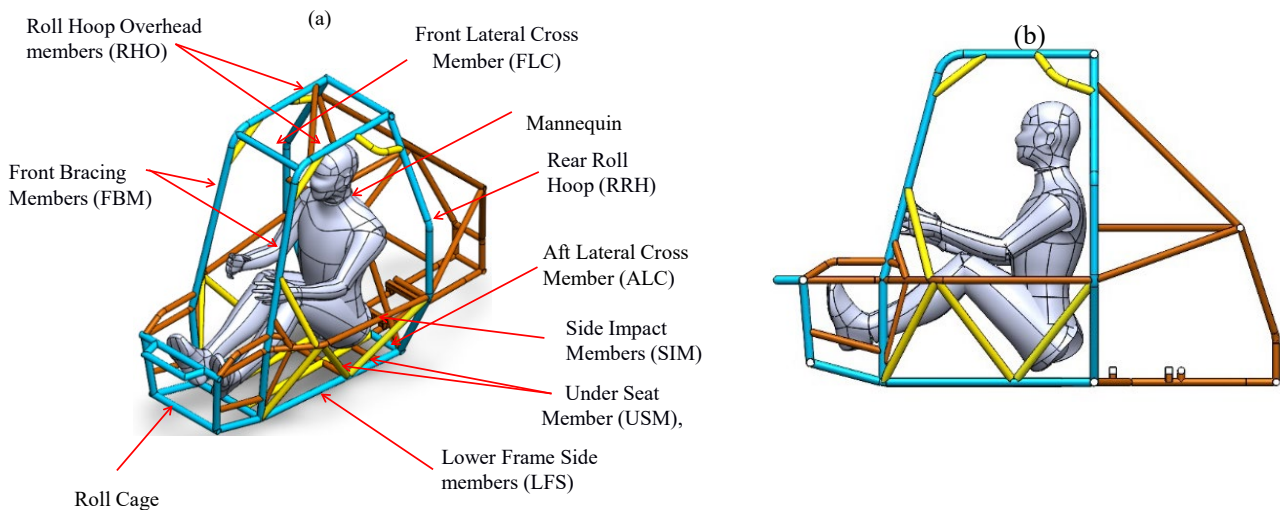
Roll cage with Mannequin (a) Isometric view, (b) Side view
